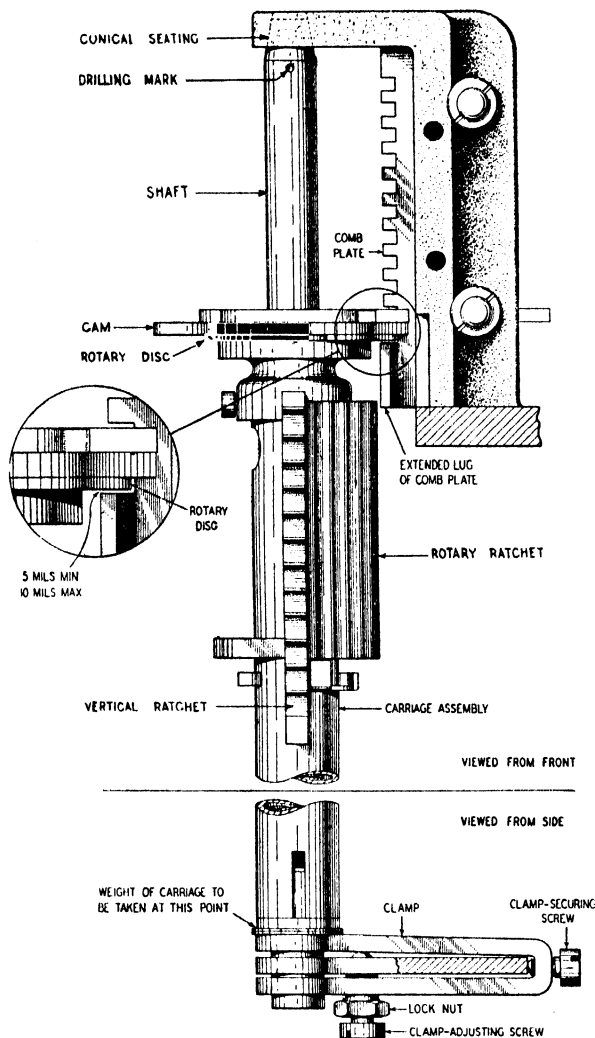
WIPER CARRIAGE, SHAFT AND CLAMP
